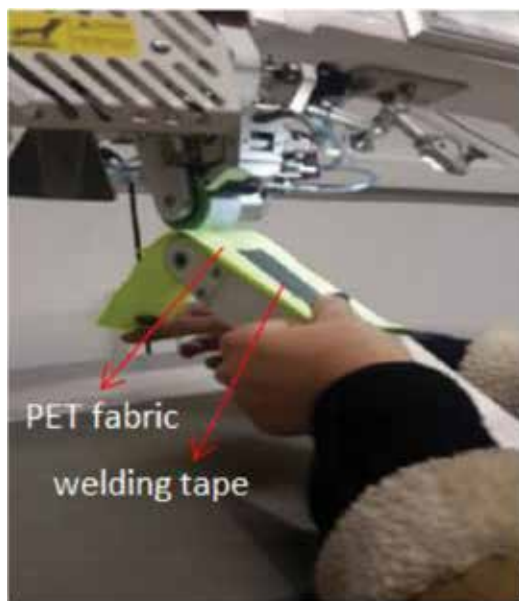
Manufacturing e-textile-based thermal panel using hot air welding machine.
